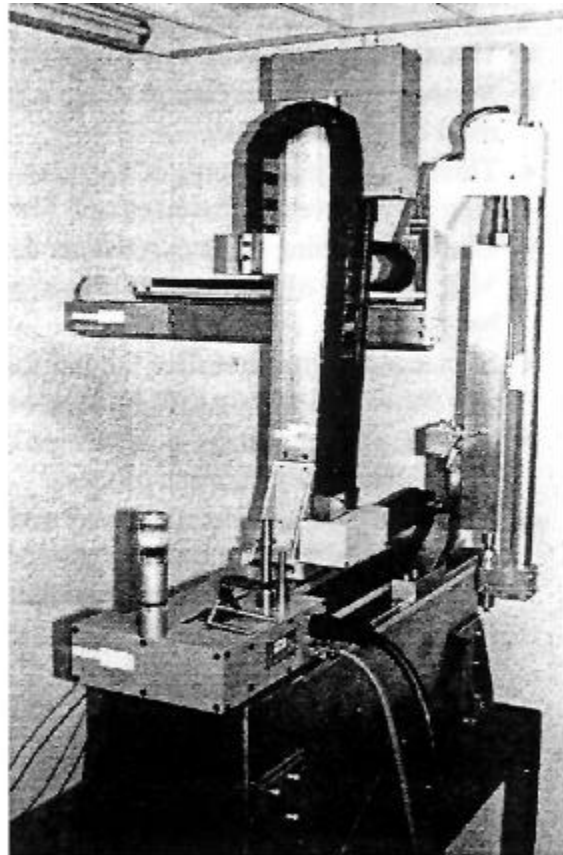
Standard Cartesian Robot used to perform scan testing in fuel plates.
